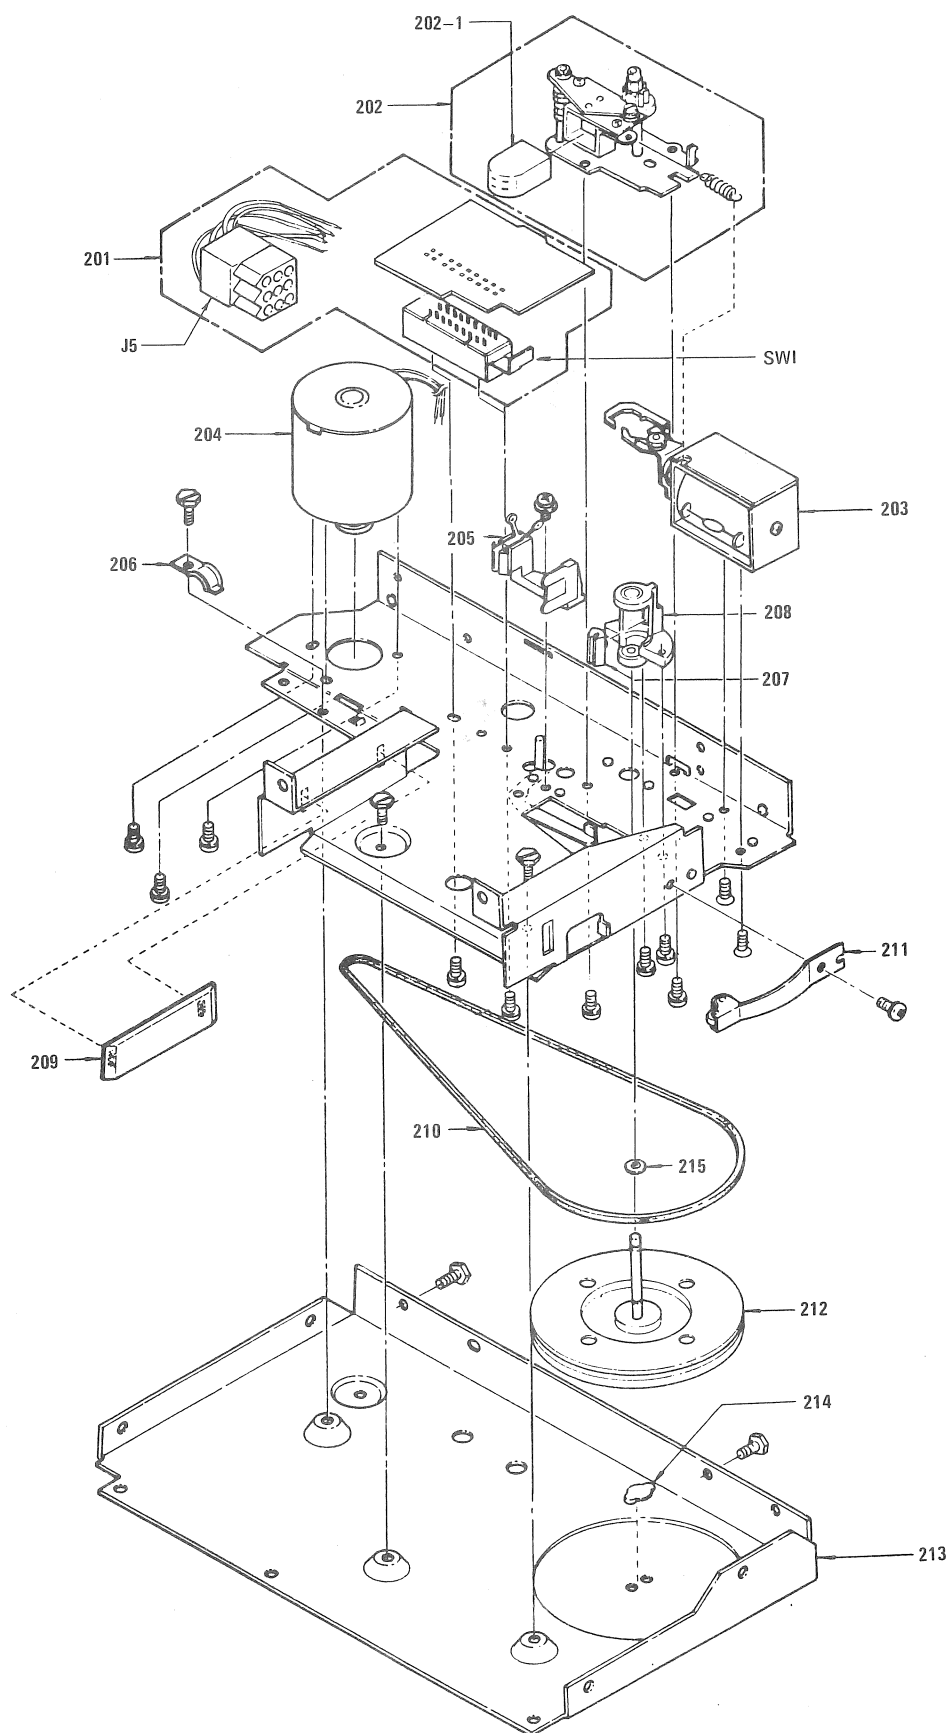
TAPE MECHANISM ASSEMBLY EXPLODED VIEW
